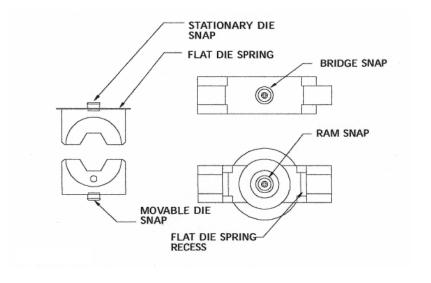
HH80C Hand Actuated Hydraulic Crimp Tool (Sheet 2)
